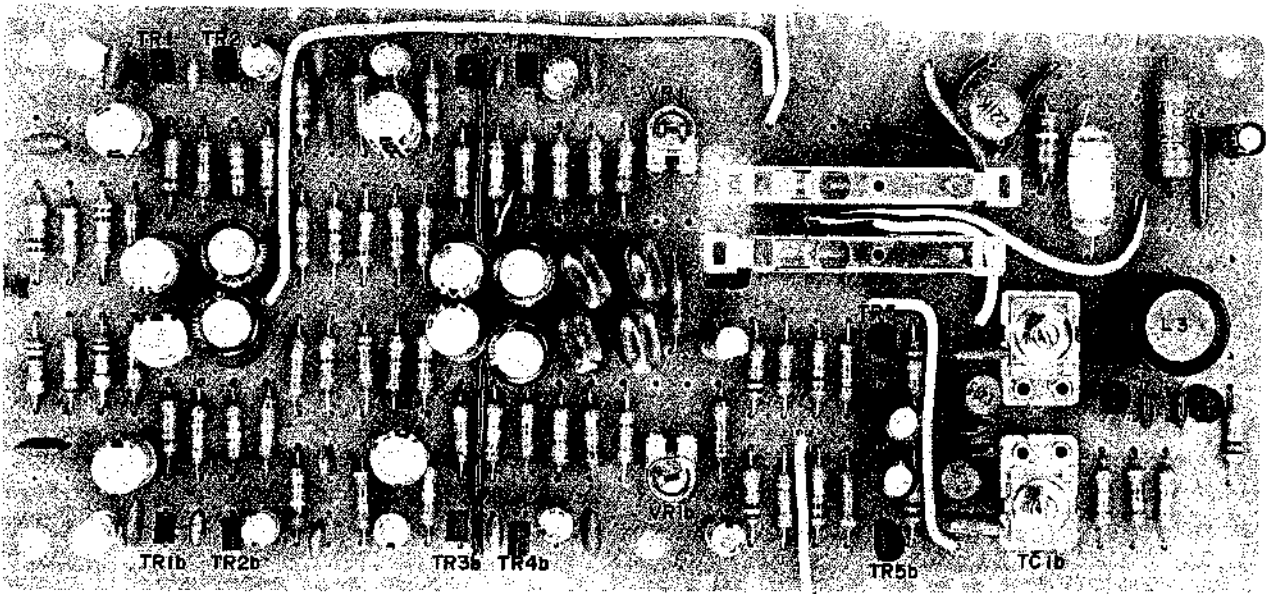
REC. AMP./OSC. P.C. BOARD TD-5003 (Front Side)
